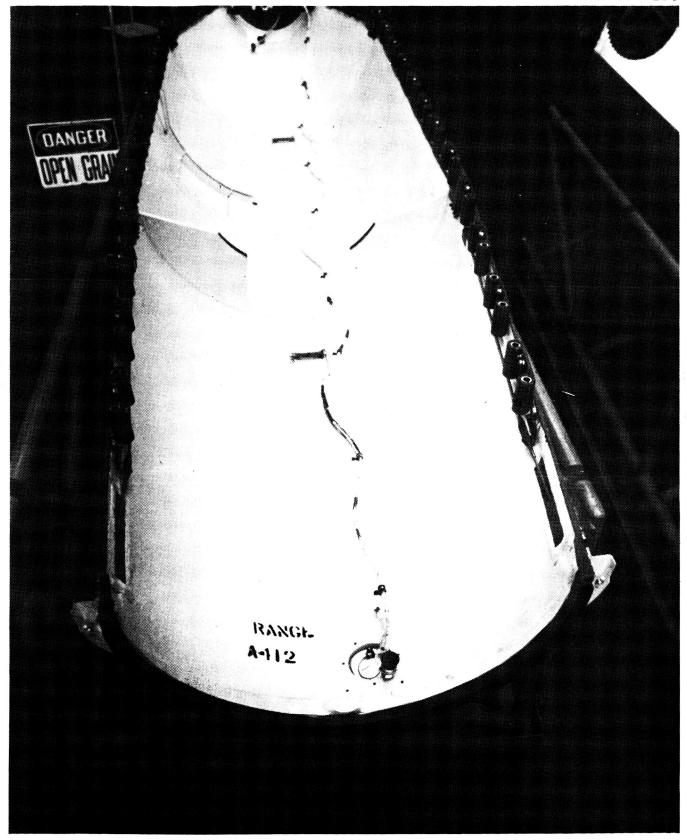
TYPICAL HEATSHIELD ASSEMBLY (SHEET 2 - DOWN RANGE SIDE)
